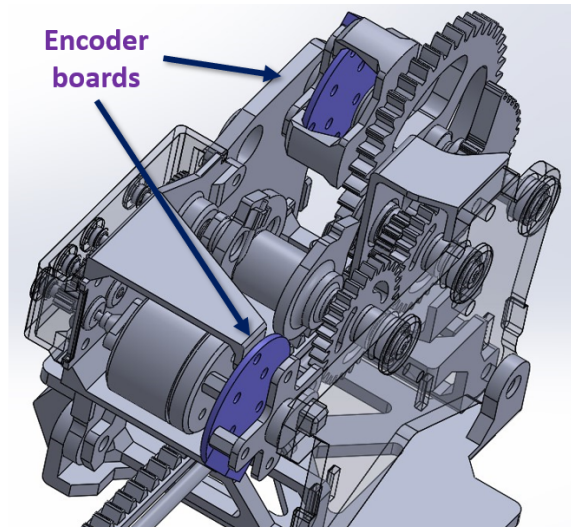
The positions of the encoder boards. The magnets (not shown) are connected to the shafts of motor and pinion.
